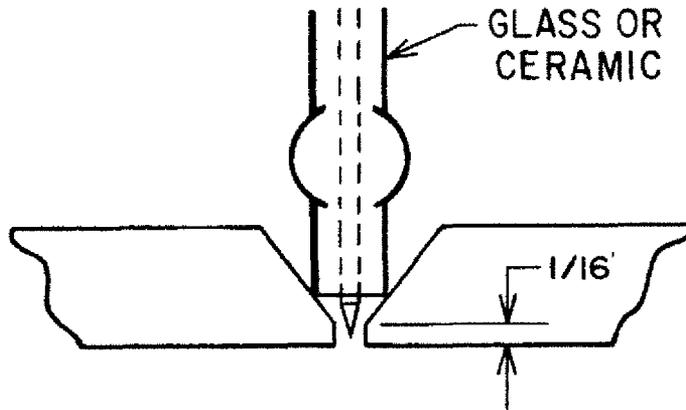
Position of GTAW torch and tungsten electrode when adjusting the electrode for root bead welding.
